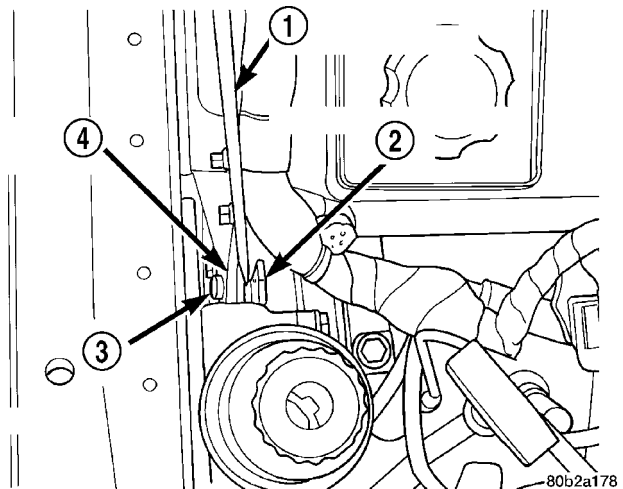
Tensioner Bracket To Power Steering Pump Sleeve
